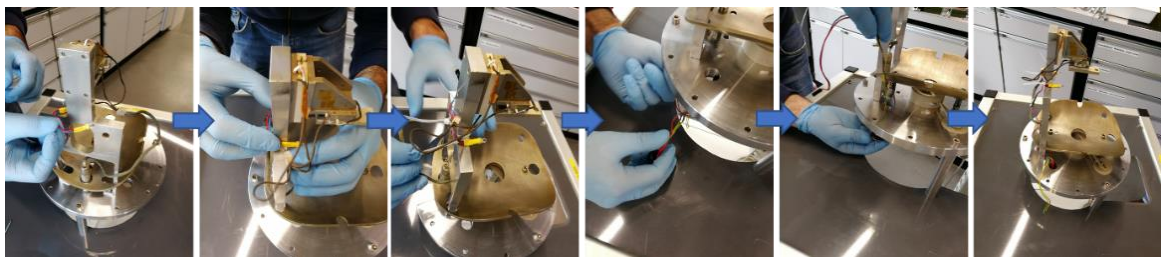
assembling the smarACT in vacuum piezo motors and fixing them into the motor mount
